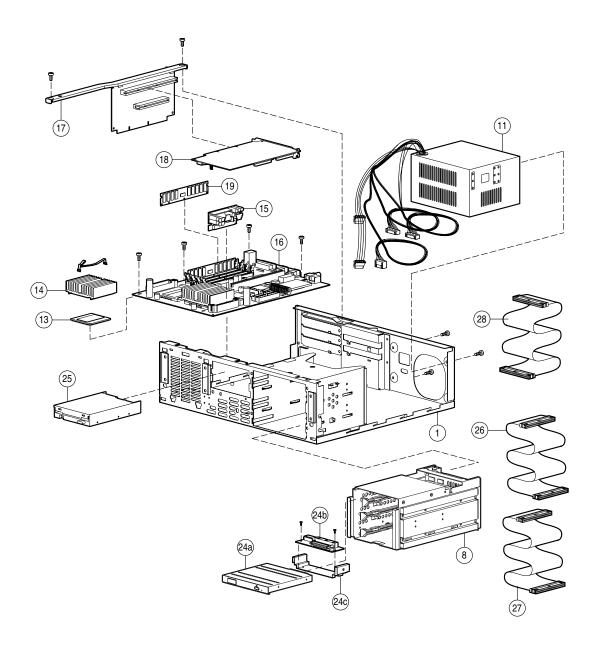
System Components Exploded View of the Compaq ProLiant 850R 6/200H Server
